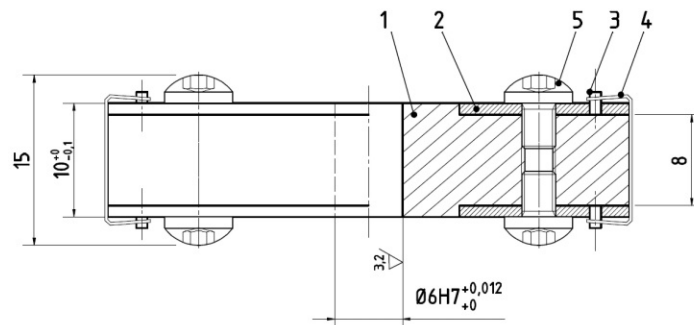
Cross-sectional drawing of the dot-like contact array roller. Two copper discs are mounted on the stainless steel roller (1). Several copper pins (3), mounted on a copper disc (2), simplify the soldering of a silver coated copper wire (4). Pan head screws (5) are used to fix the copper disc on the stainless steel roller. The total height of the cylinder is 10 mm and the diameter is 46 mm. Details on this concept were developed together with my supervisor Dr. Alexander Usoskin.
